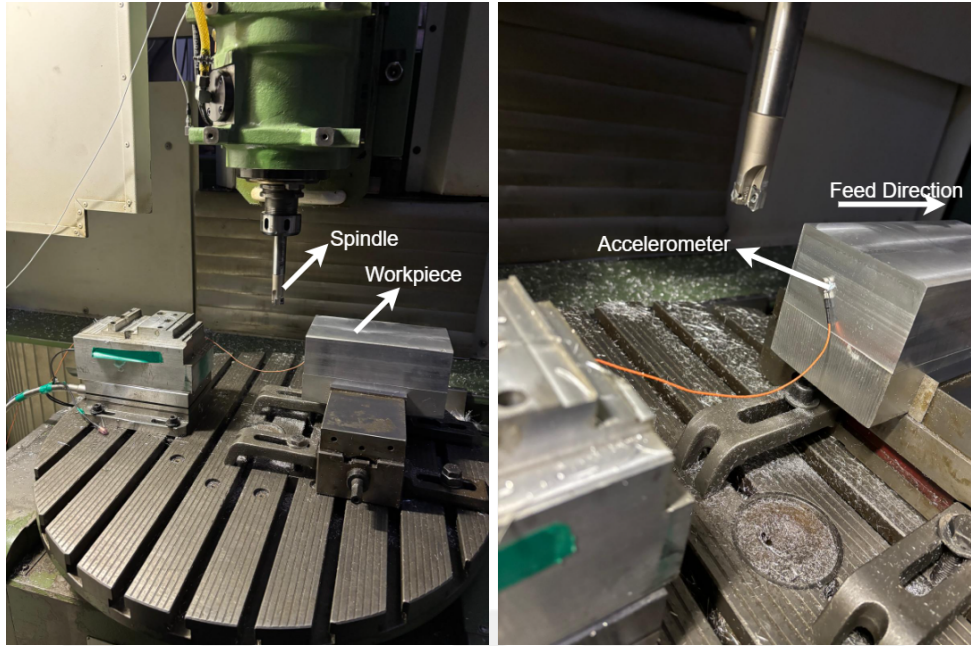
Experimental setup showing the modified Deckel FP5cc CNC machine tool
